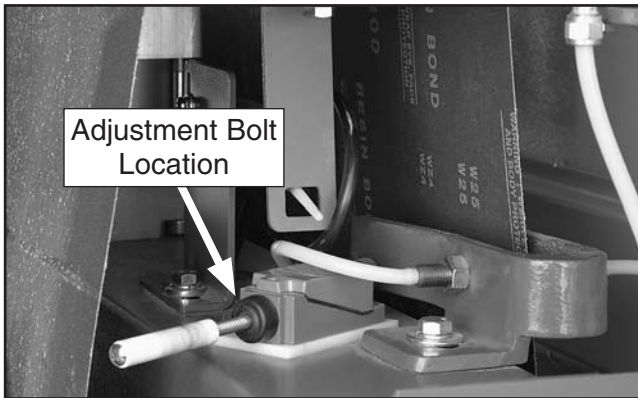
Tracking limit switch adjustment bolt (right side shown).
